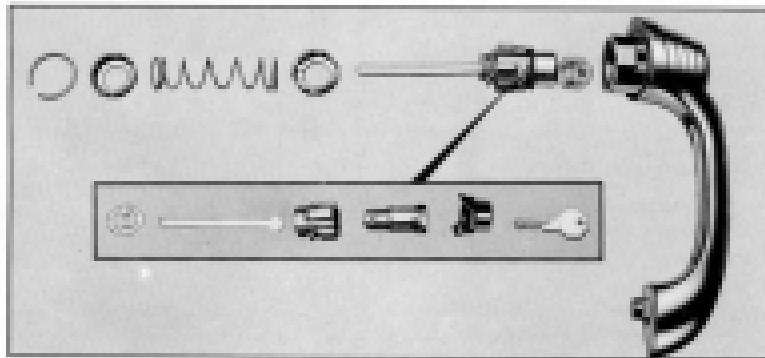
Door Lock Assembly Details, 78 and 88 Series
